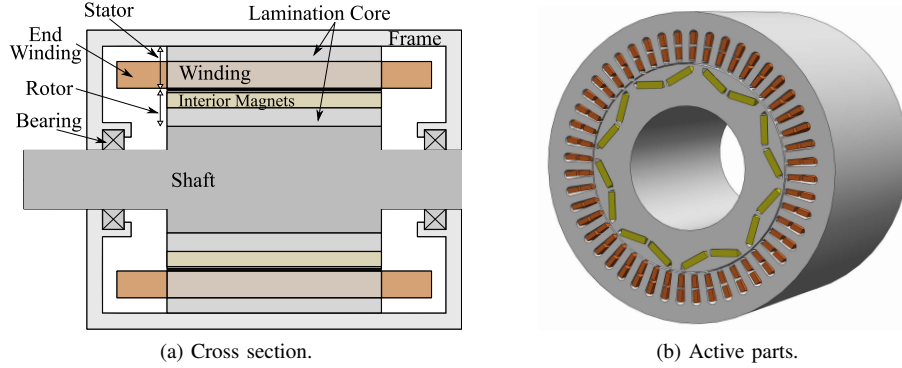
Axial cross section of machine configuration, and the active machine parts, of v-shaped reference motors.
